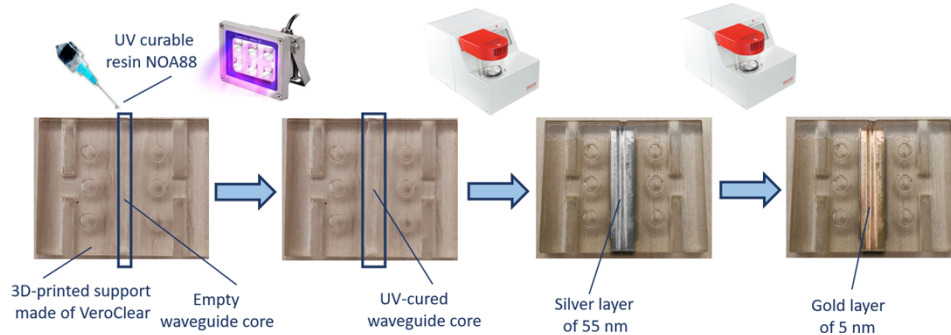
Step-by-step 3D-printed plasmonic probe manufacturing process.
